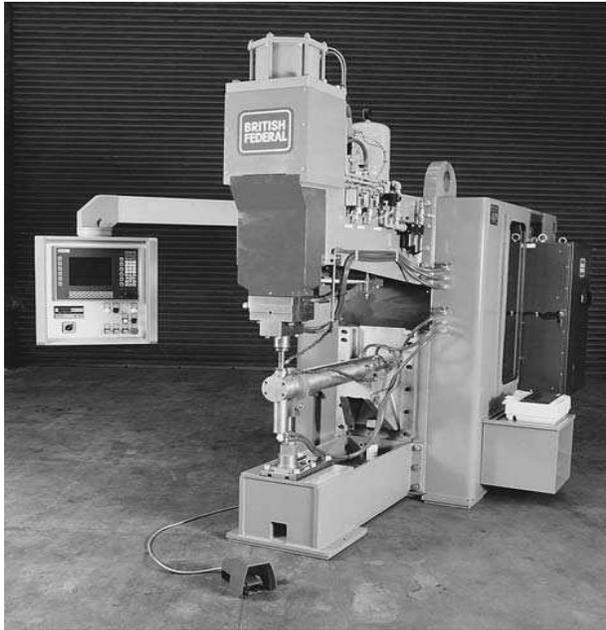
Modern pedestal mounted spot welder for aerospace applications
